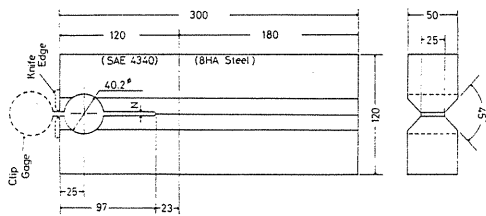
Configuration of the BCL-type DCB Test Specimen
